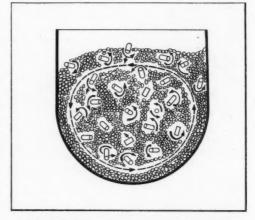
Diagrammatic sectional view through the container of the machine shown in Fig. 1. In addition to vibrating, the chips and parts rotate slowly, as a complete mass
